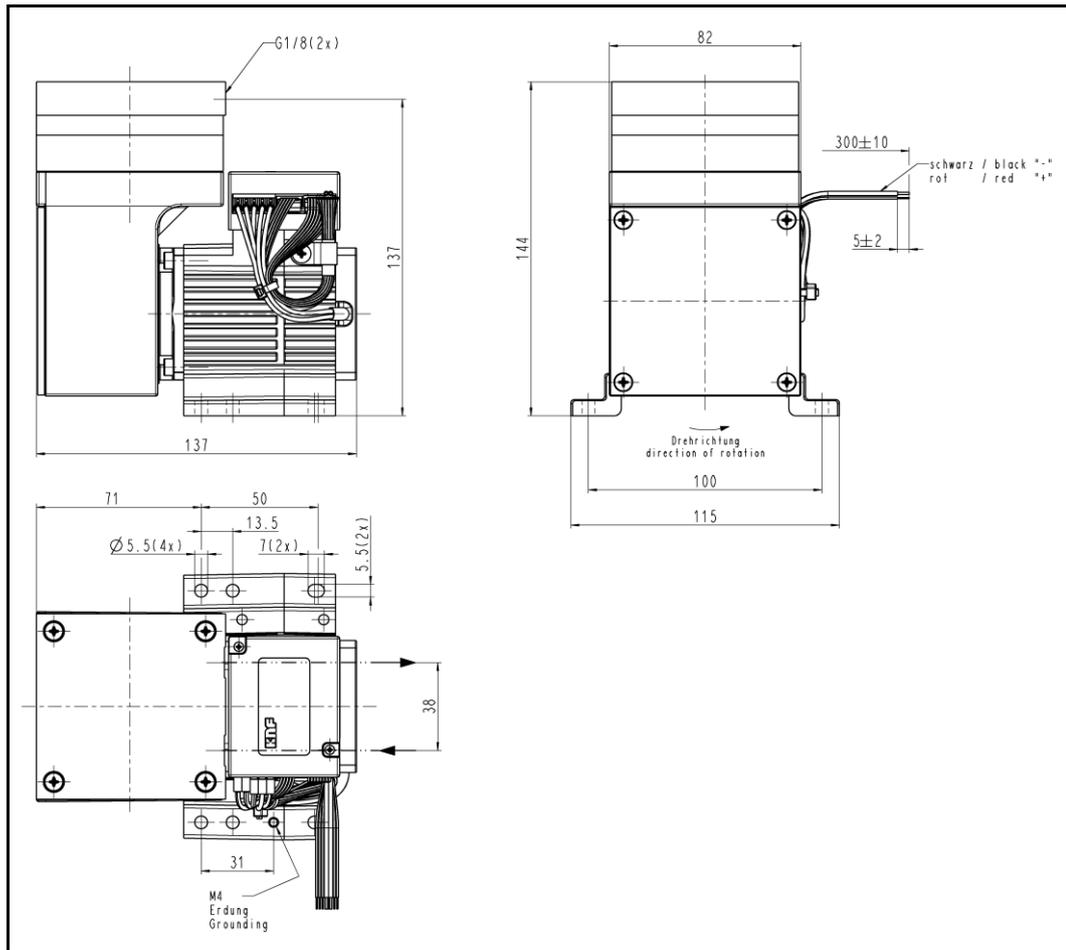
Mounting dimensions pump series N 838 A_12.29 DC-B
